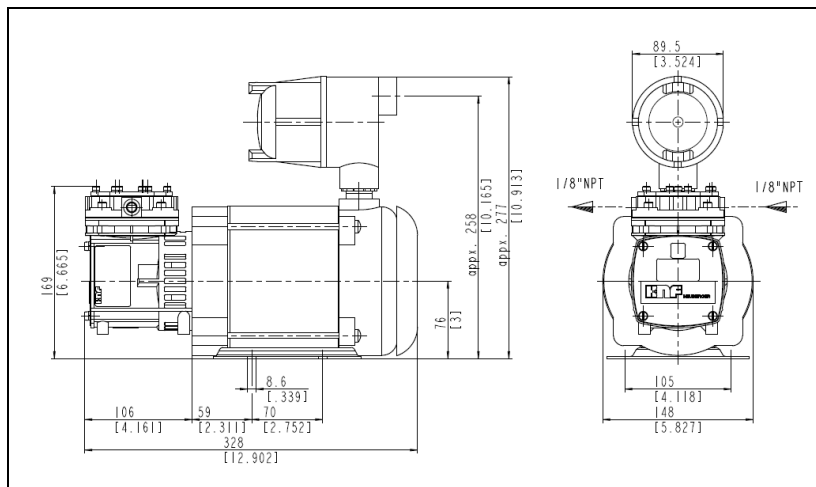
Mounting dimensions UN026A_I EX including .9 versions (All dimensional tolerances conform to DIN ISO 2768-1, Tolerance Class V)
